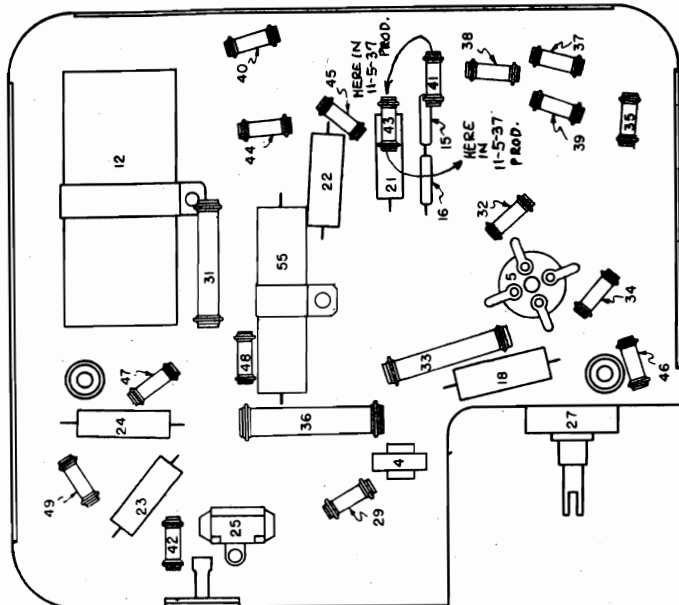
PARTS LAYOUT-BOTTOM VIEW
